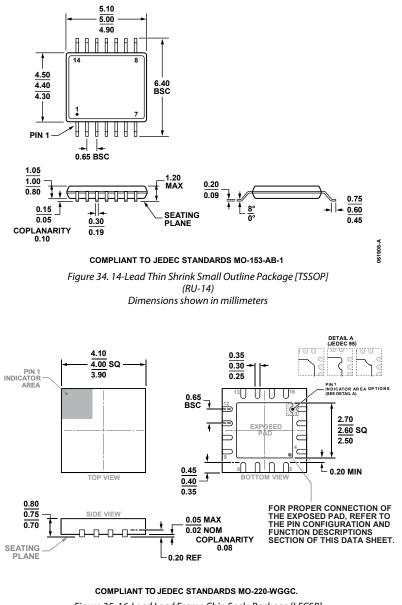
16-Lead Lead Frame Chip Scale Package [LFCSP] 4 mm × 4 mm Body and 0.75 mm Package Height (CP-16-17) Dimensions shown in millimeters 38-23-2018-C
